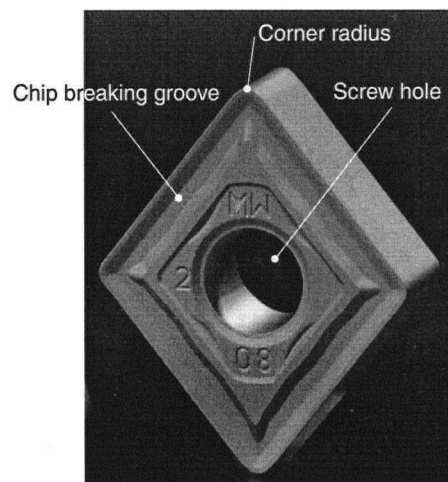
Single point cutting tool with corner radius and chip breaking groove
